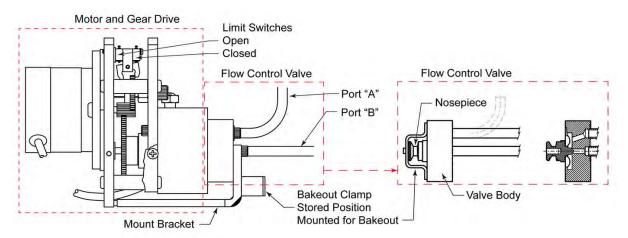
Motor Drive and Flow Control Valve Assembly
